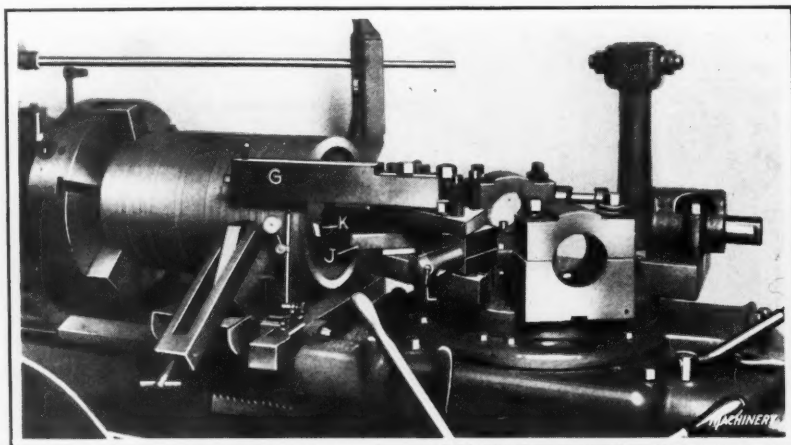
Turning the Surface of the Drum that contacts with the Steadyrest Rolls, in order to make the Drum run True
